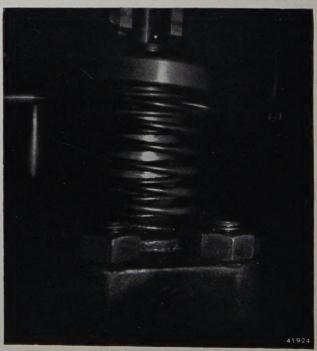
Photograph during the observation of the valve springs of a Diesel motor with the help of the stroboscope.
